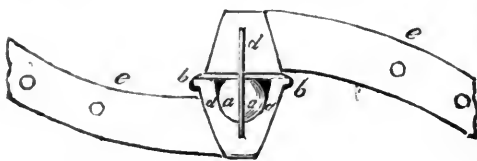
is a section of a brass cup or joint, in which is formed a hemispherical socket, in working order. The following is a description of its parts, viz:—*a a*, a spherical bearing, in the centre of which is a groove for oil; *b b*, the recess, which contains a leather collar; *d d*, the hemispherical cavity, which contains the spherical bearing, (*a a*) and also the fluid necessary to lubricate its surfaces, and thereby prevent friction; *c*, shows the groove, formed in the spherical bearing, which permits the fluid to flow up, and lubricates its surfaces every time the ball is moved; *d*, shows the groove, formed in the upper joint for the reception of the lubricating fluid; *e e*, elliptical straps.
